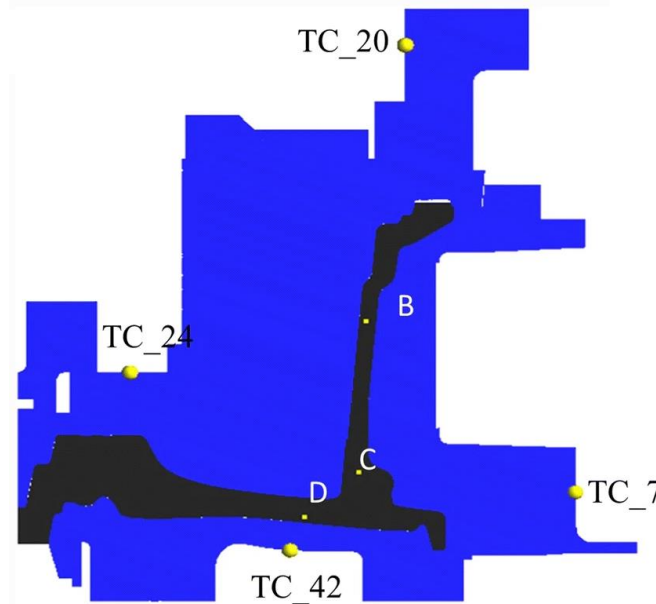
Thermocouple locations in the wheel and die cross-section, cutting plane through wheel spoke
